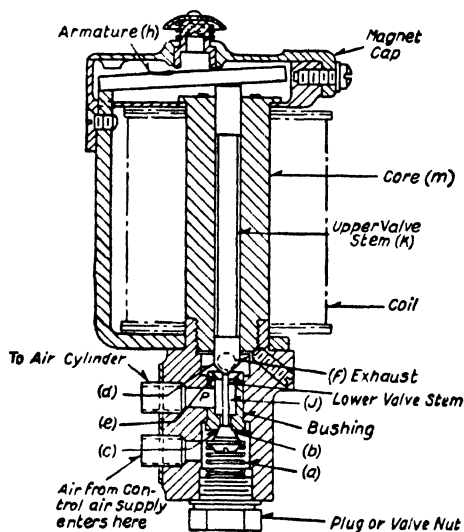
Cross Section of Open-Coil Type Standard Magnet Valve
